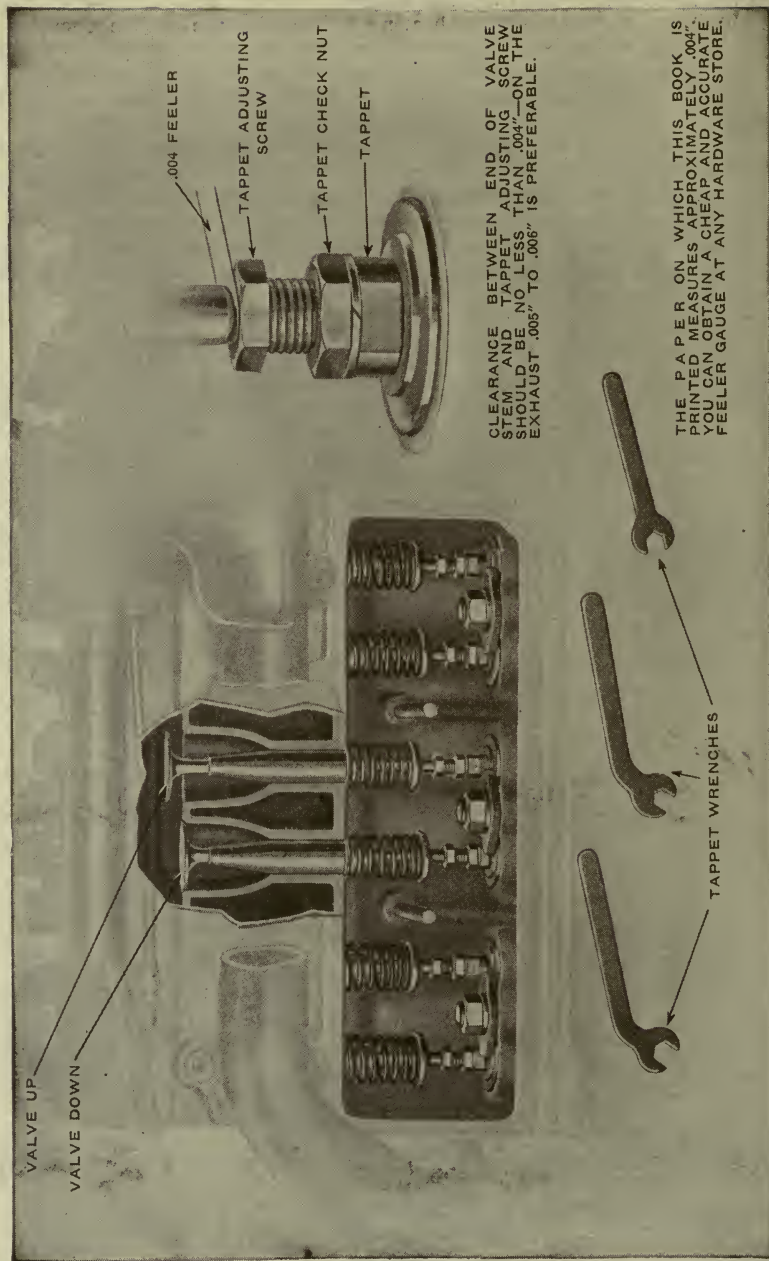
Adjusting Valve Tappets (Hudson Engine).
